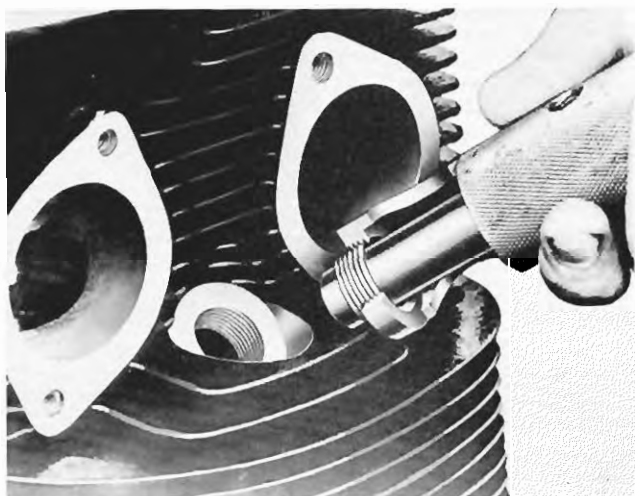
Heli-Coil Insert Assembled on Inserting Tool
